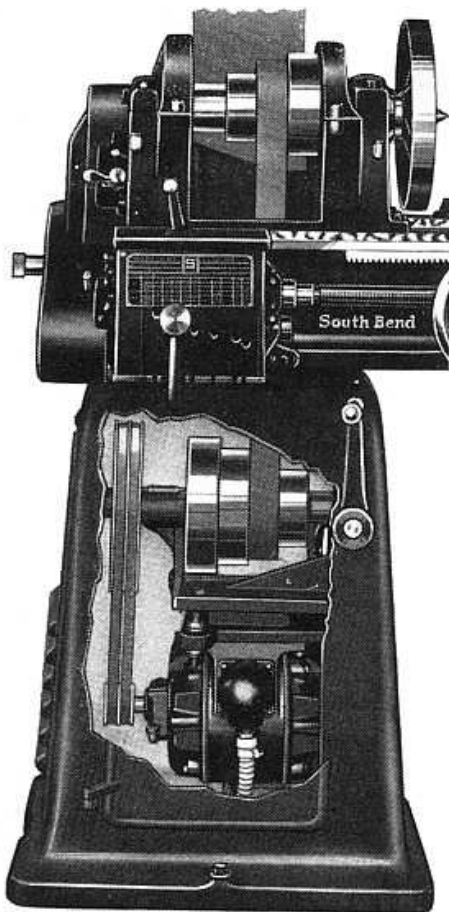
Front View of Lathe with Underneath Belt Motor Drive Unit.
